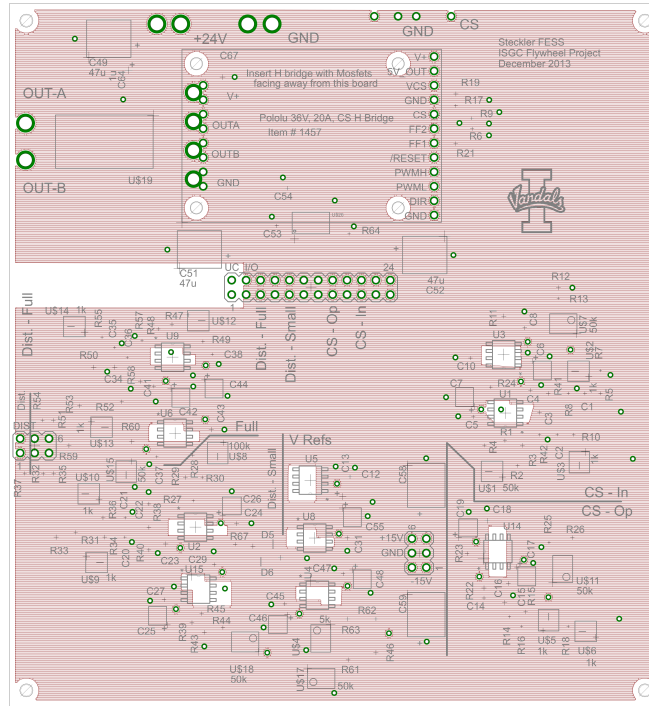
Prototype PCB Ground Plane (Third) Layer - EAGLE Layout Editor View
